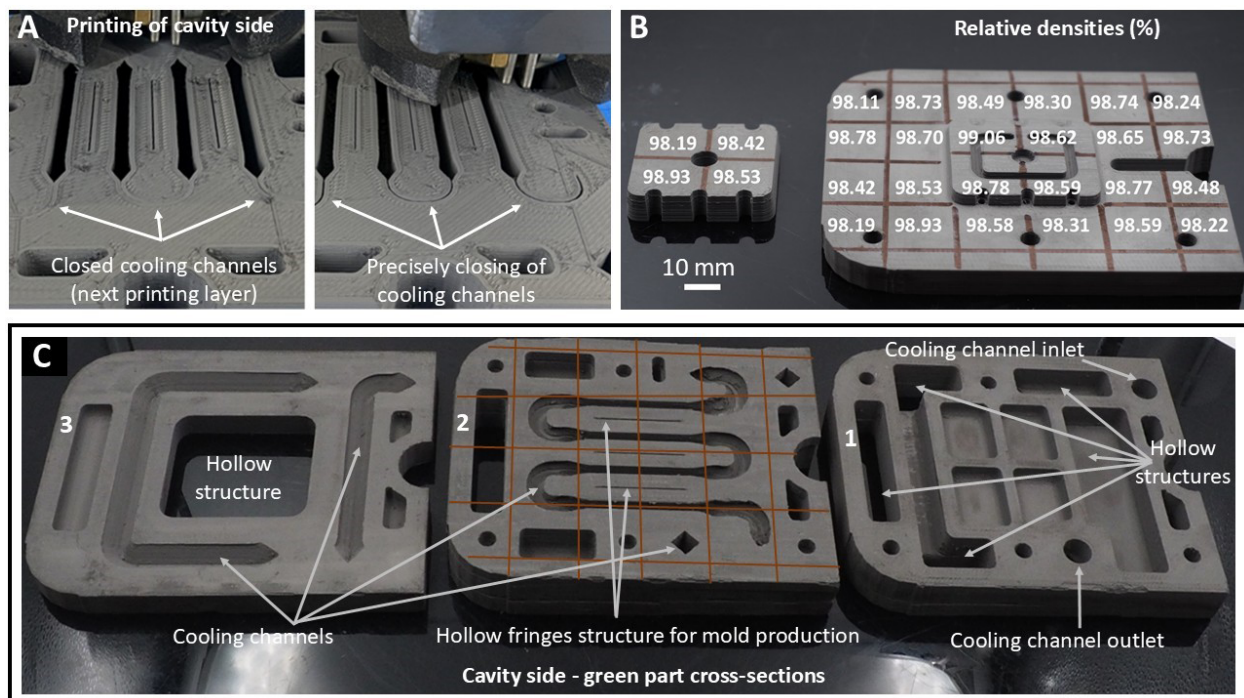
Images of injection molding tool components: (A) Cavity side during three-dimensional printing, (B) horizontal plane view of the upper section of the core side after a cross-sectional cut, showing the relative densities of the marked region, and (C) horizontal plane views of the cavity side after cross-sectional cuts at three levels (1, 2, and 3 represent the top, middle, and bottom parts of a complete printed cavity, respectively)
